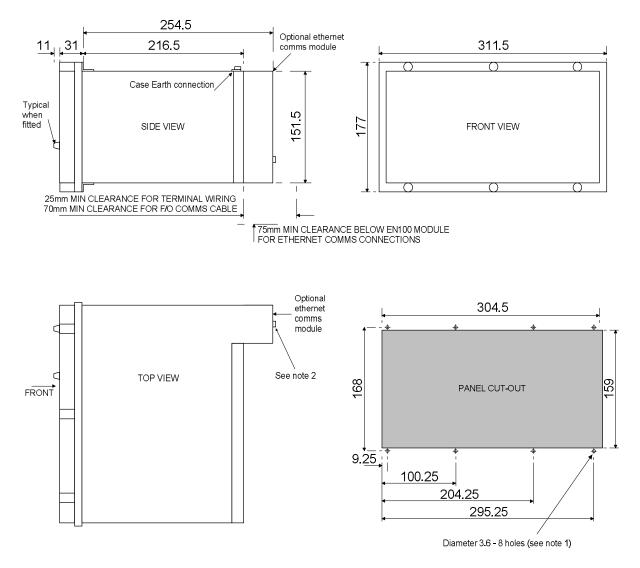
E6 Case overall dimensions and panel drilling details (All dimensions in are mm)
